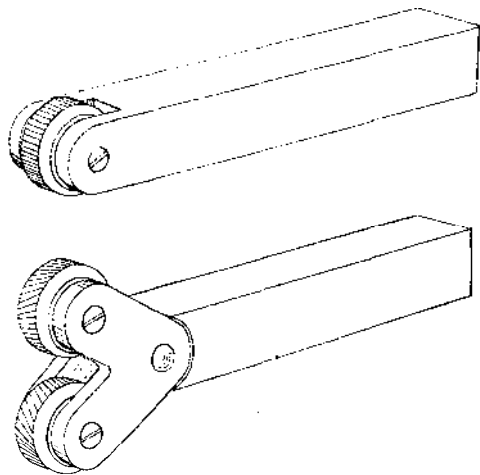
Standard type of single- and double-wheel knurling tools for cross slide application.
